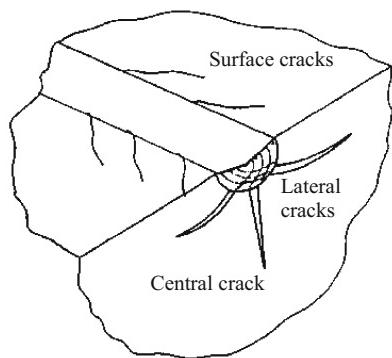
Crack formation scheme produced in glass by a cutting roller.
